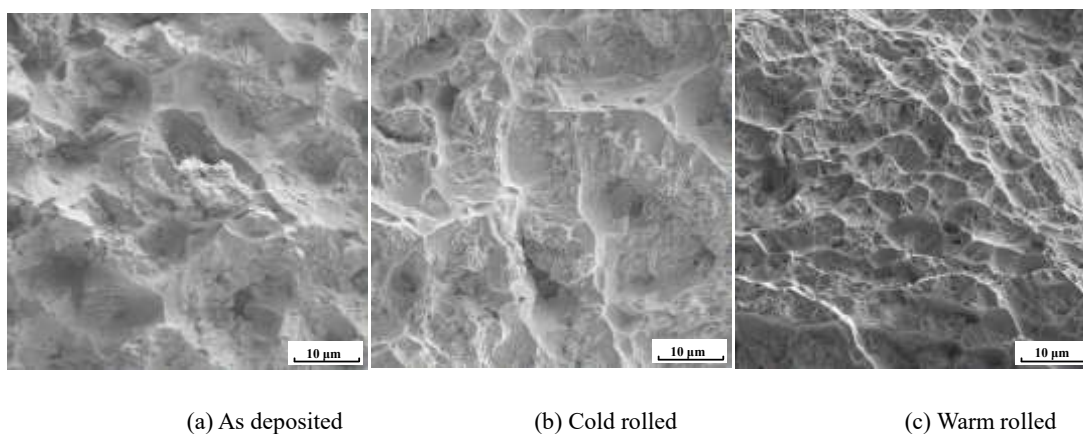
Fracture surfaces of tensile test after HSA heat treatment: (a) as deposited; (b) cold rolled; (c) warm rolled
